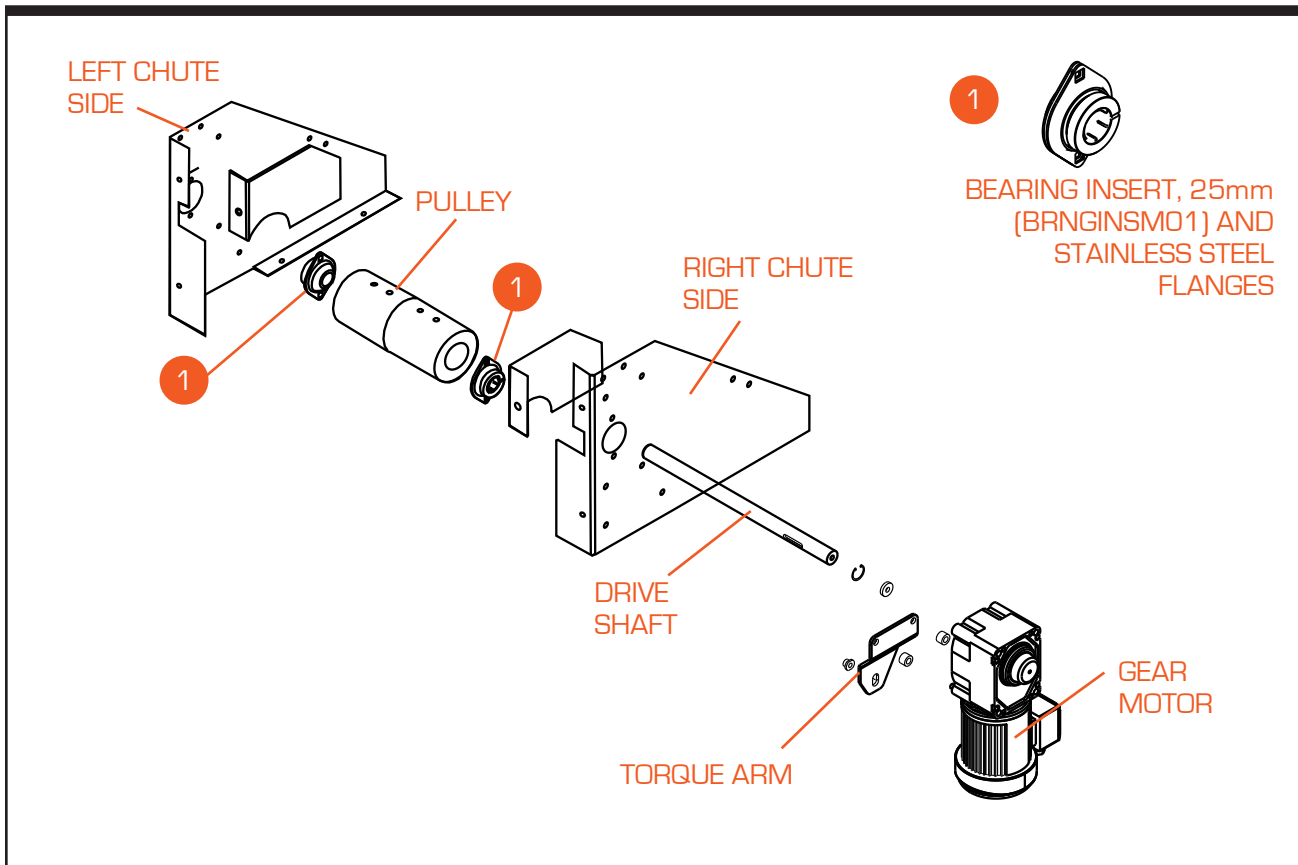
Drive Pulley (Head) with AC Gear Motor Sub-Assembly
